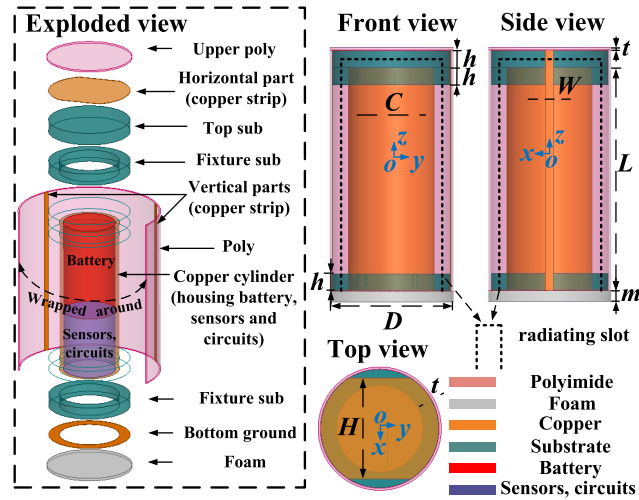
Exploded view of proposed antenna and its front, side and top views.
